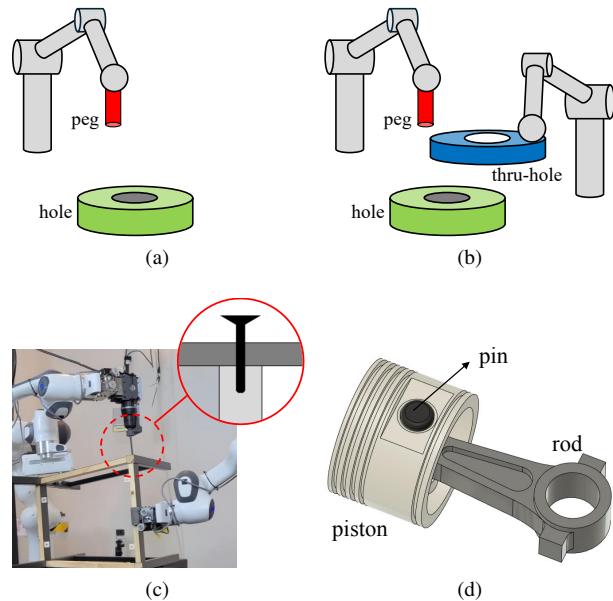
Peg-in-Hole assembly: (a) conventional, (b) layered, (c) bolt fastening, and (d) piston assembly
